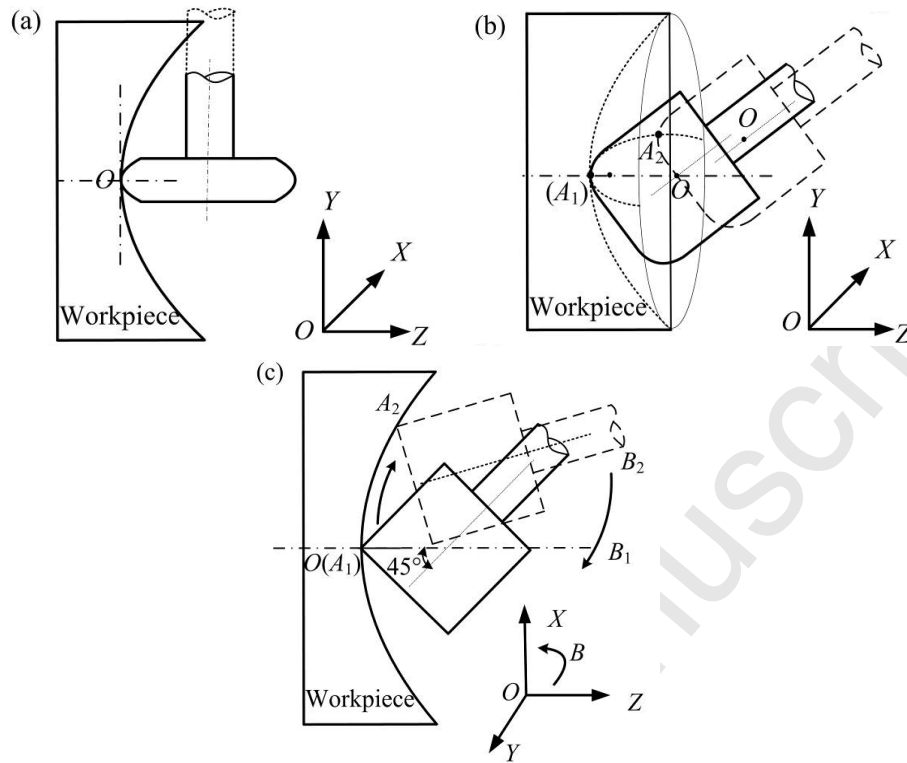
Schematic illustration of three different grinding modes: (a) perpendicular mode, (b) inclined axis mode using an arc wheel and (c) single point inclined axis mode.
